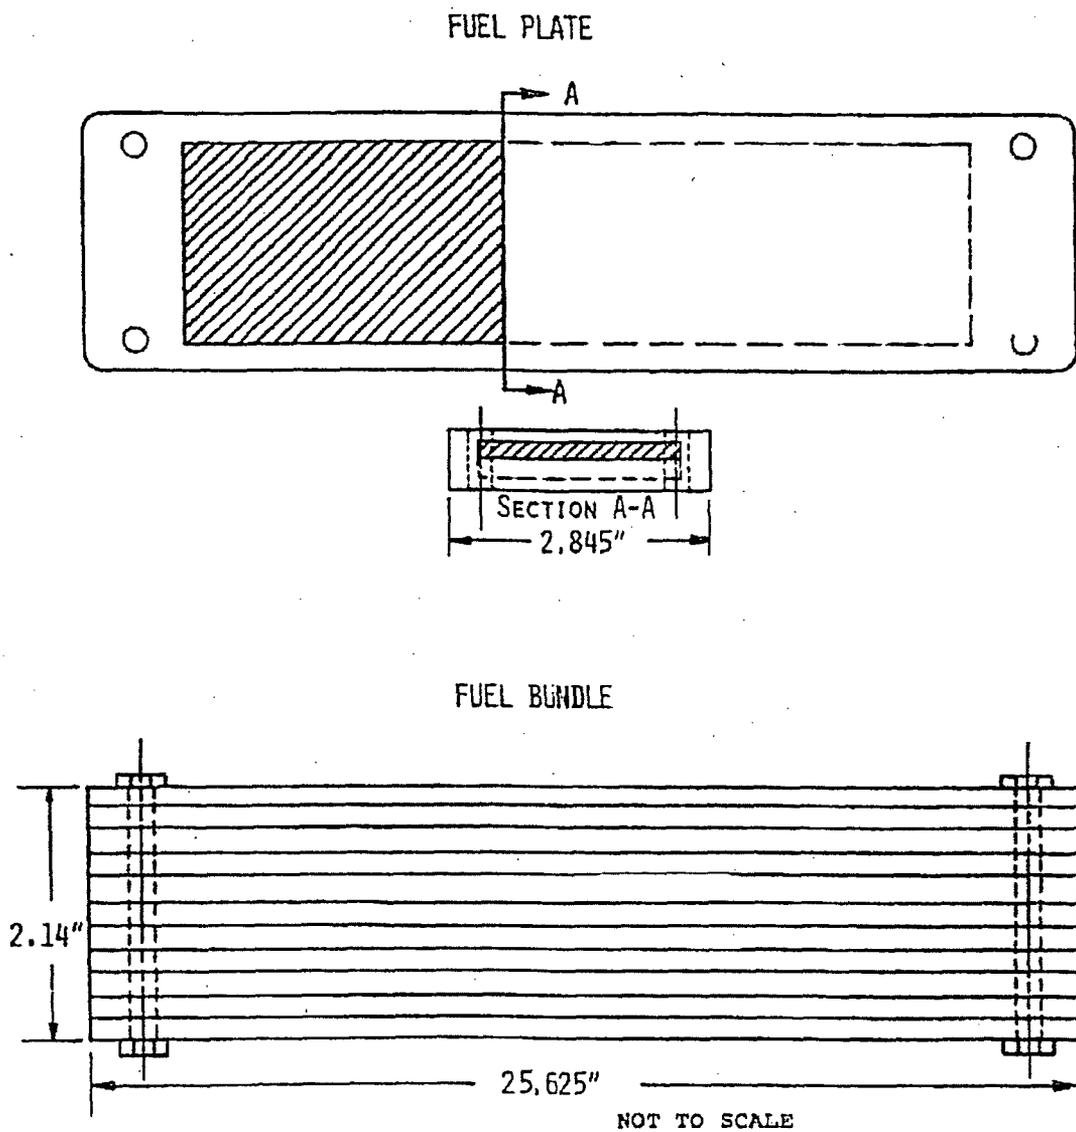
UFTR Fuel Plate and Fuel Bundle Geometric Arrangement
